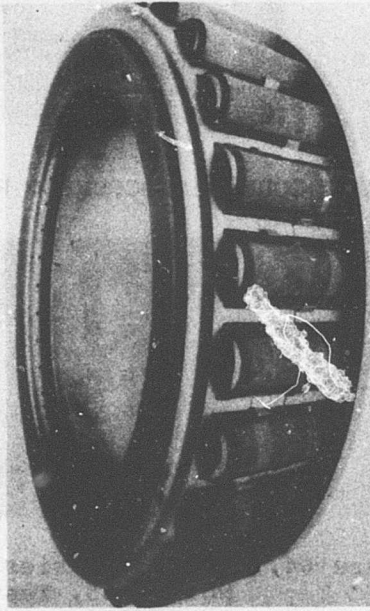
XC11439-Series Bearing After Test, Bearing No. 73-65, Test No. 5--Damaged Due to Large Sheets of Silver Plating Separating From the Cage.
